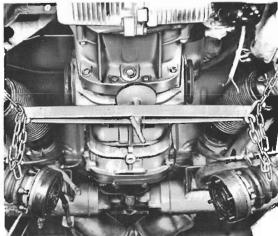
Angled support bracket for clutch cable guide tube. Mounting nuts have been removed.
